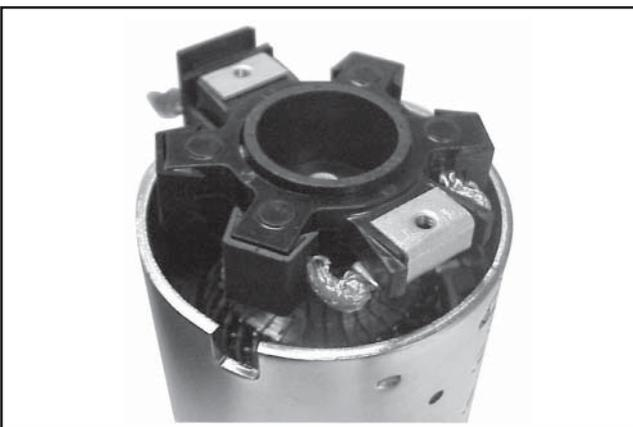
Installing Brush Holder Assembly with Supplied Tube.
